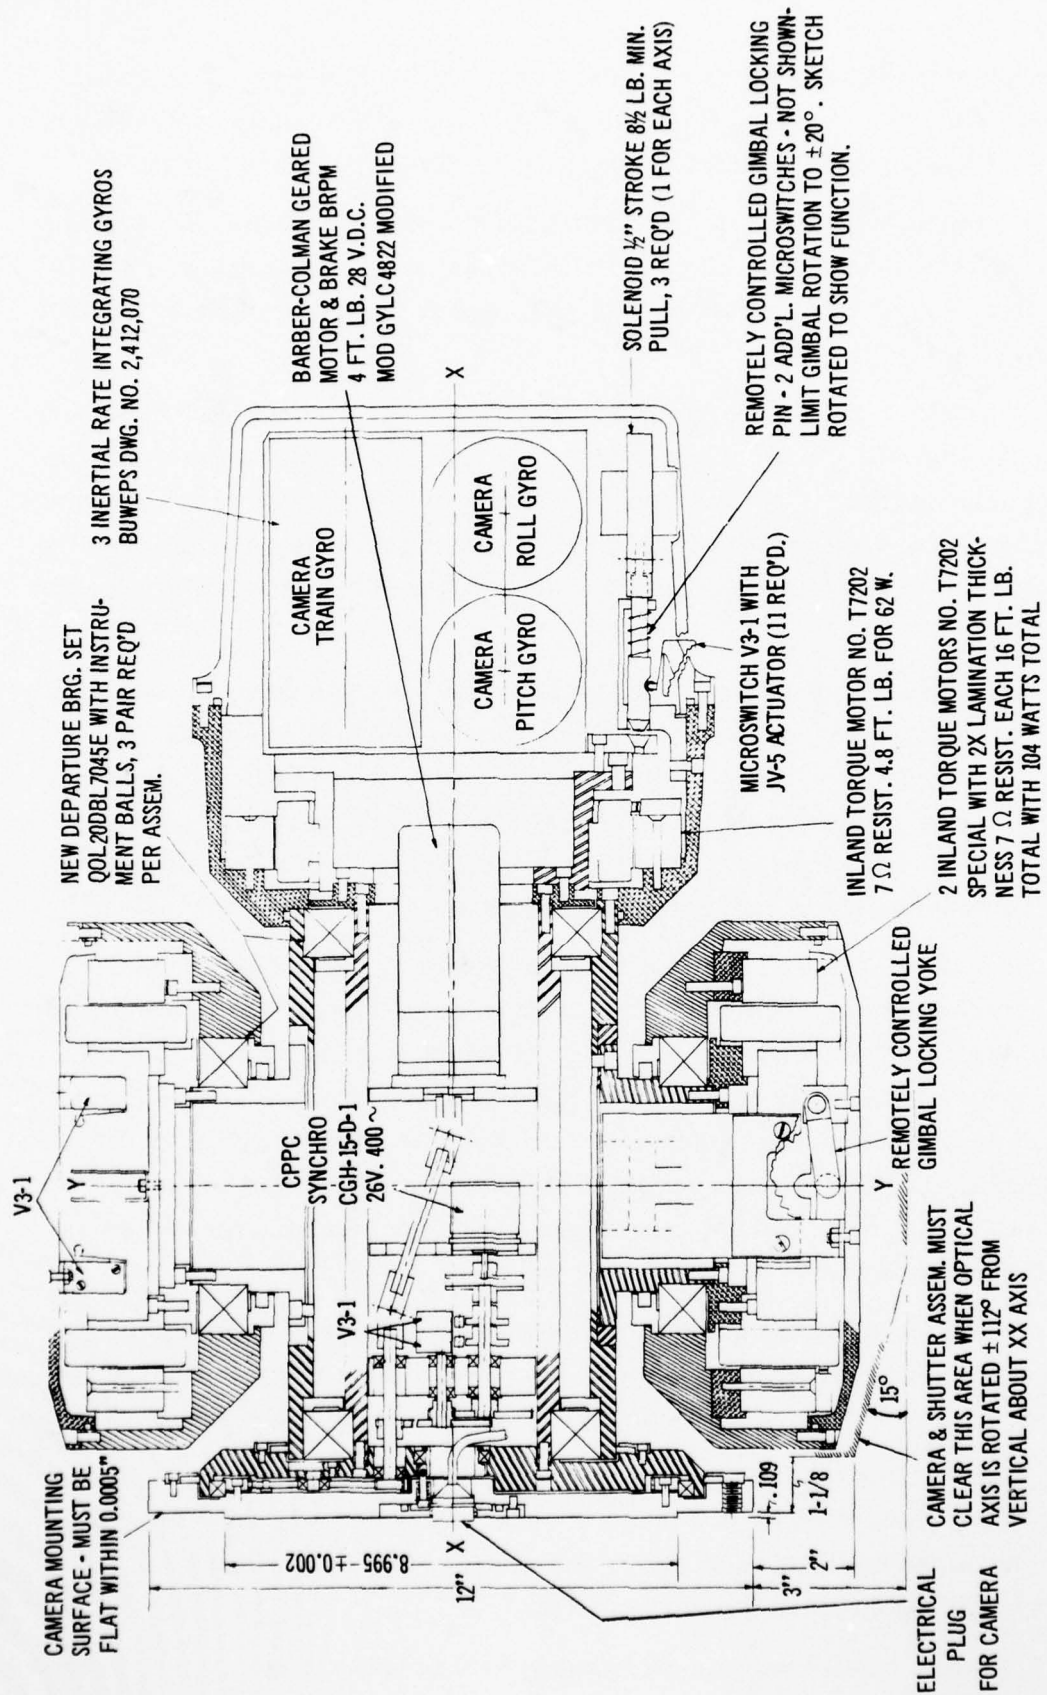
Mechanical assembly, roll and pitch gimbals.
